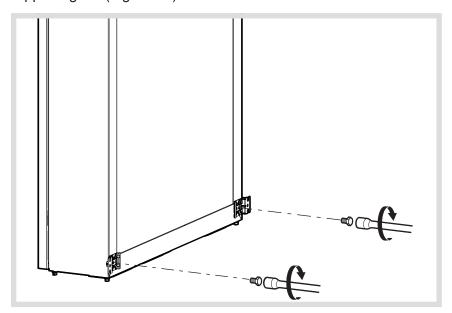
Assembly of mounting tabs for fixing in a sideways position
